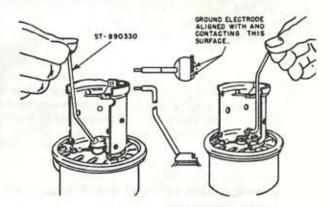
CHECK PLUG ALIGNMENT AND GAP
